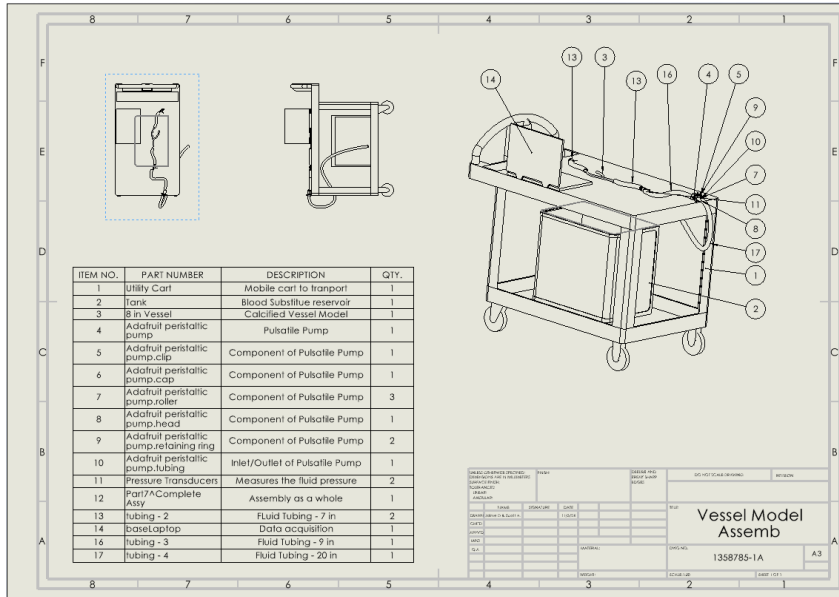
Final CAD Drawing for Calcified Vessel Model Assembly
